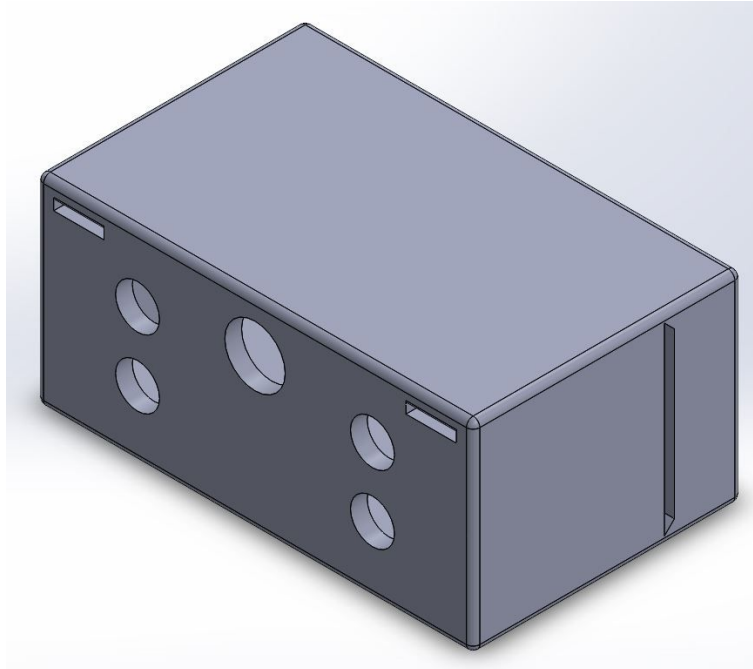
Solidworks model of the front sensor housing for the final prototype.
